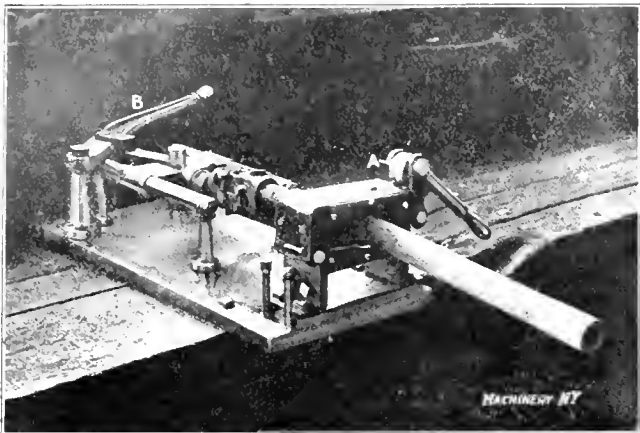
Tool for Pressing Air Hose Couplings into Place
